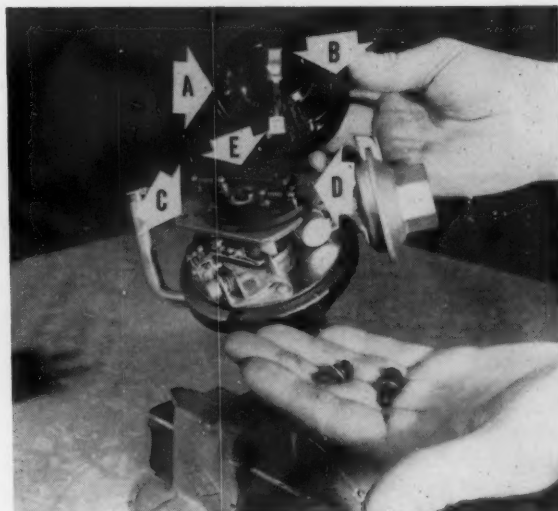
Exploded view shows rotor and points where attaching screws are placed. E is the advance unit.
